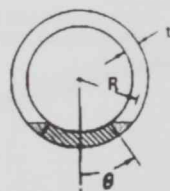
A schematic pipe cross-section geometry containing a surface crack.
